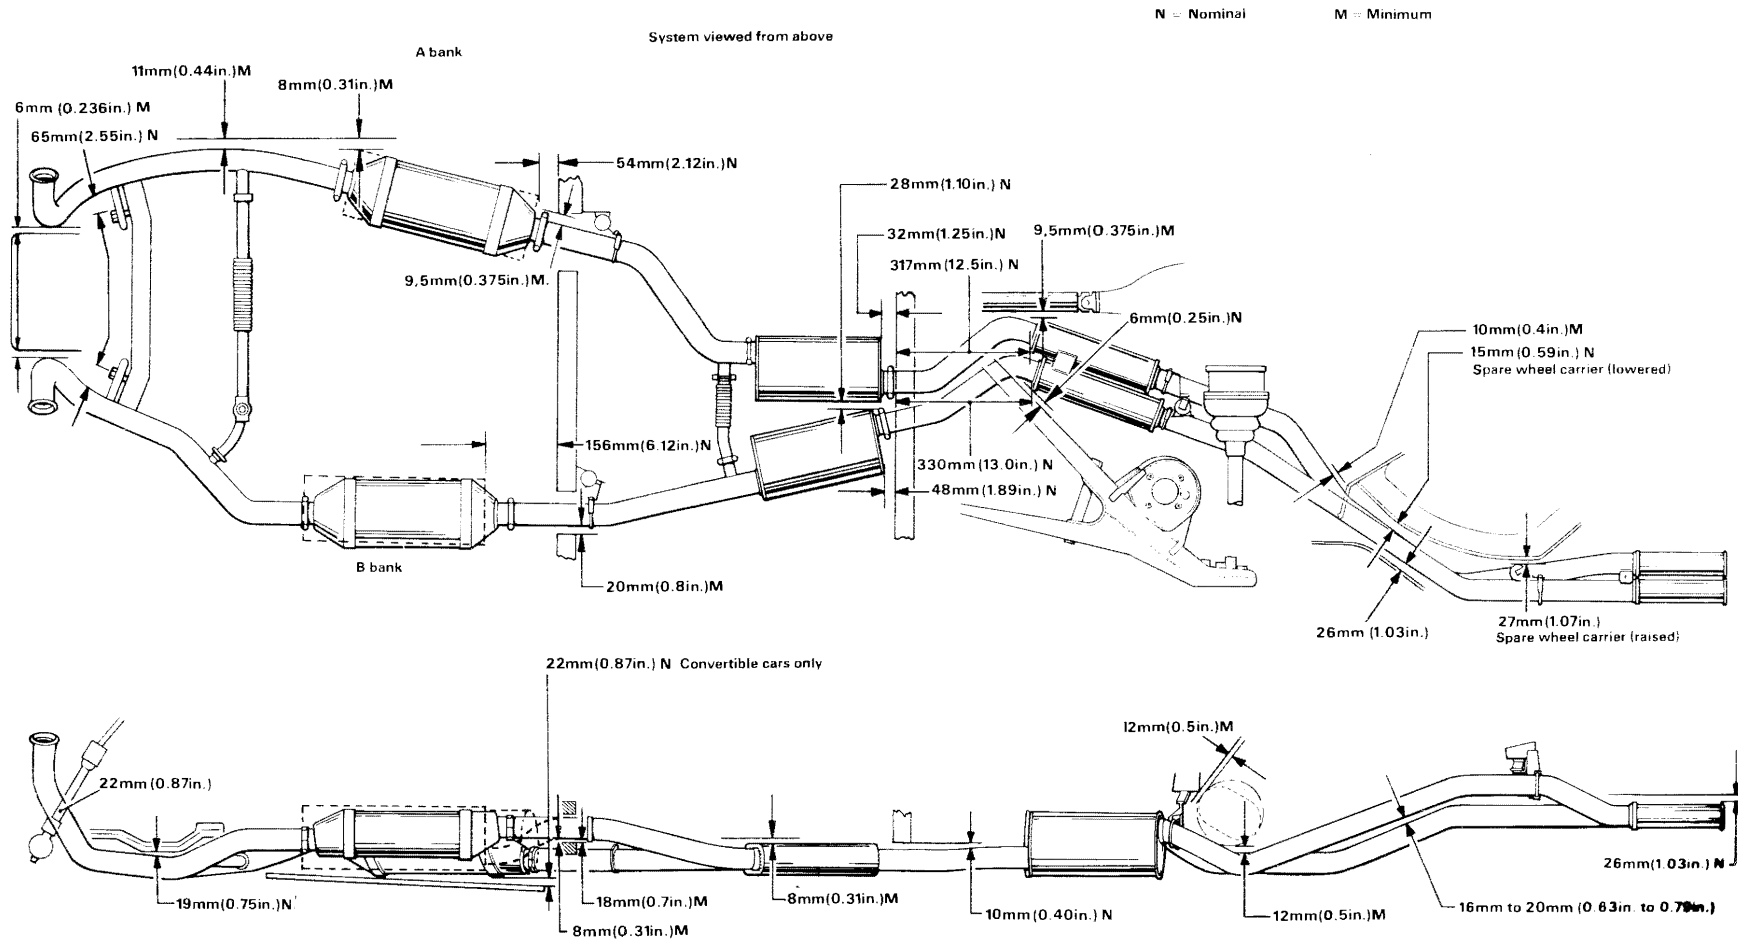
TWIN EXHAUST SYSTEM - CLEARANCE DIMENSIONS
